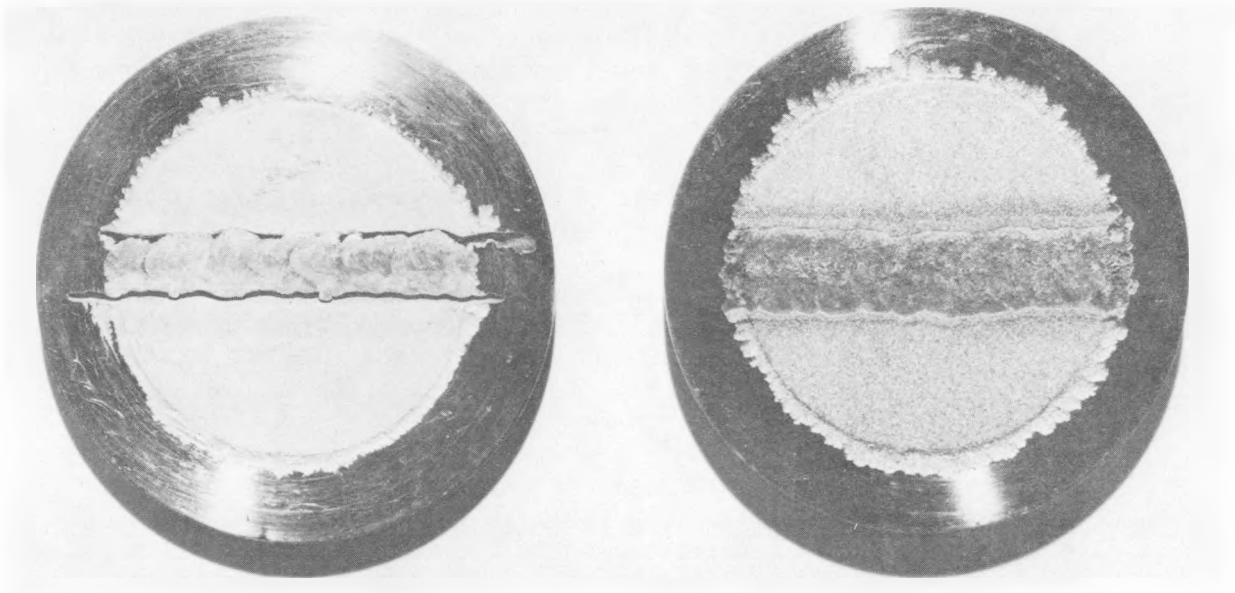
Welded Heat Transfer Test Specimen
